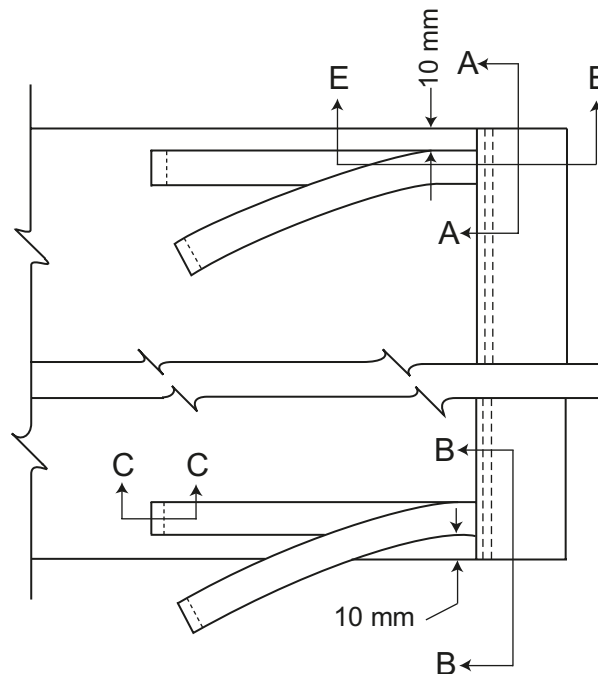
Header, open-sleeve with tie tapes — Type 2 flags
